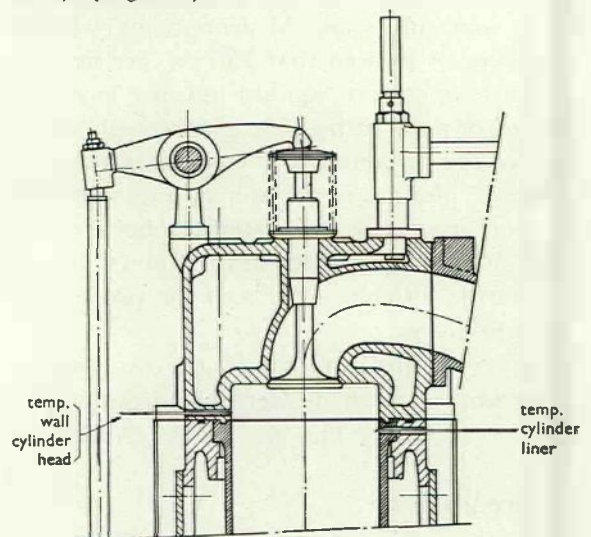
Thermocouples in cylinder liner and cylinder head.
